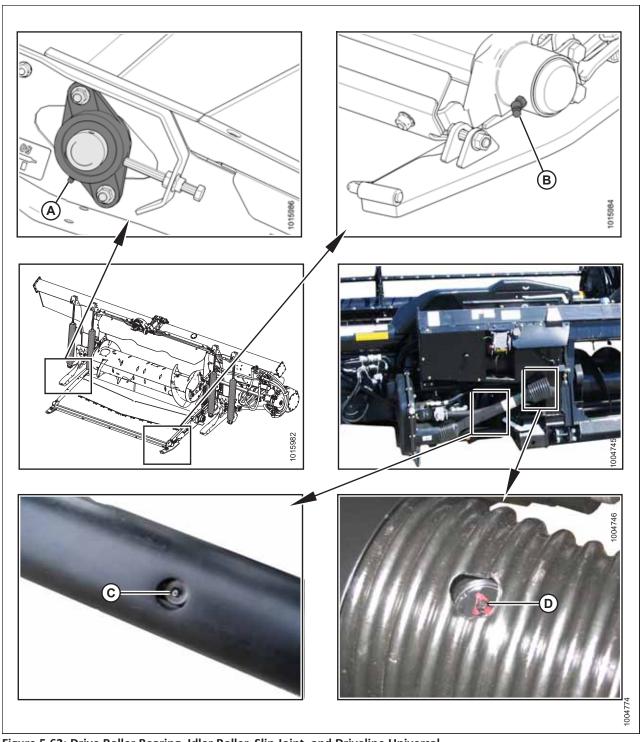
Drive Roller Bearing, Idler Roller, Slip Joint, and Driveline Universal
